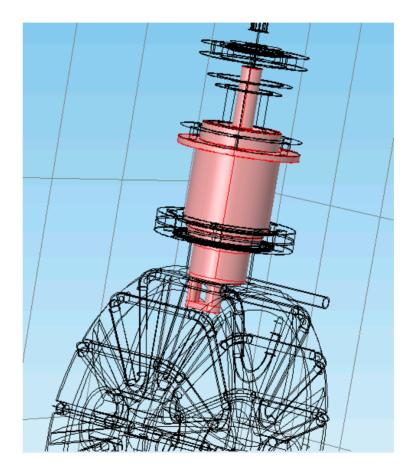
Buncher cavity drawing indicating main parts: Cavity body (2) cavity cover (1), vacuum pump (0). Motion control system (4). RF Coupler (5), Pick-up (3), Fixed Tuner (6).
